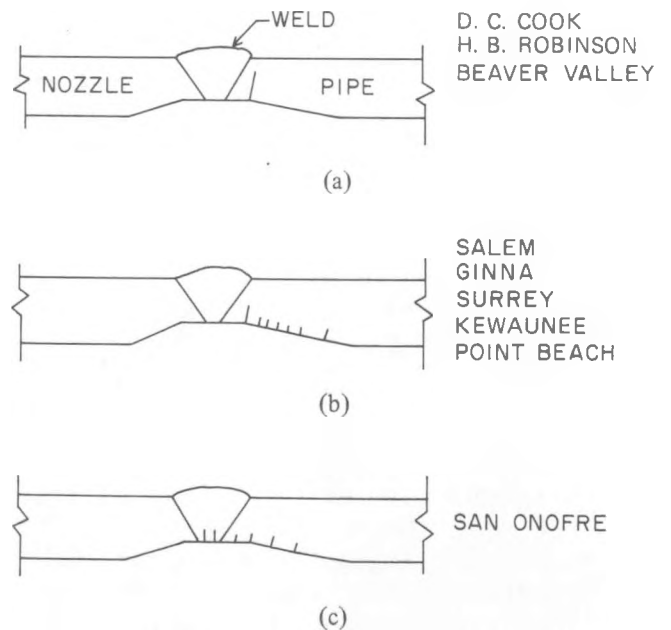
Schematic diagram of crack morphology by type and plant: (a) single large crack at root of the notch, (b) several small cracks in counterbore region, and (c) shallow cracks in weld and counterbore region.
